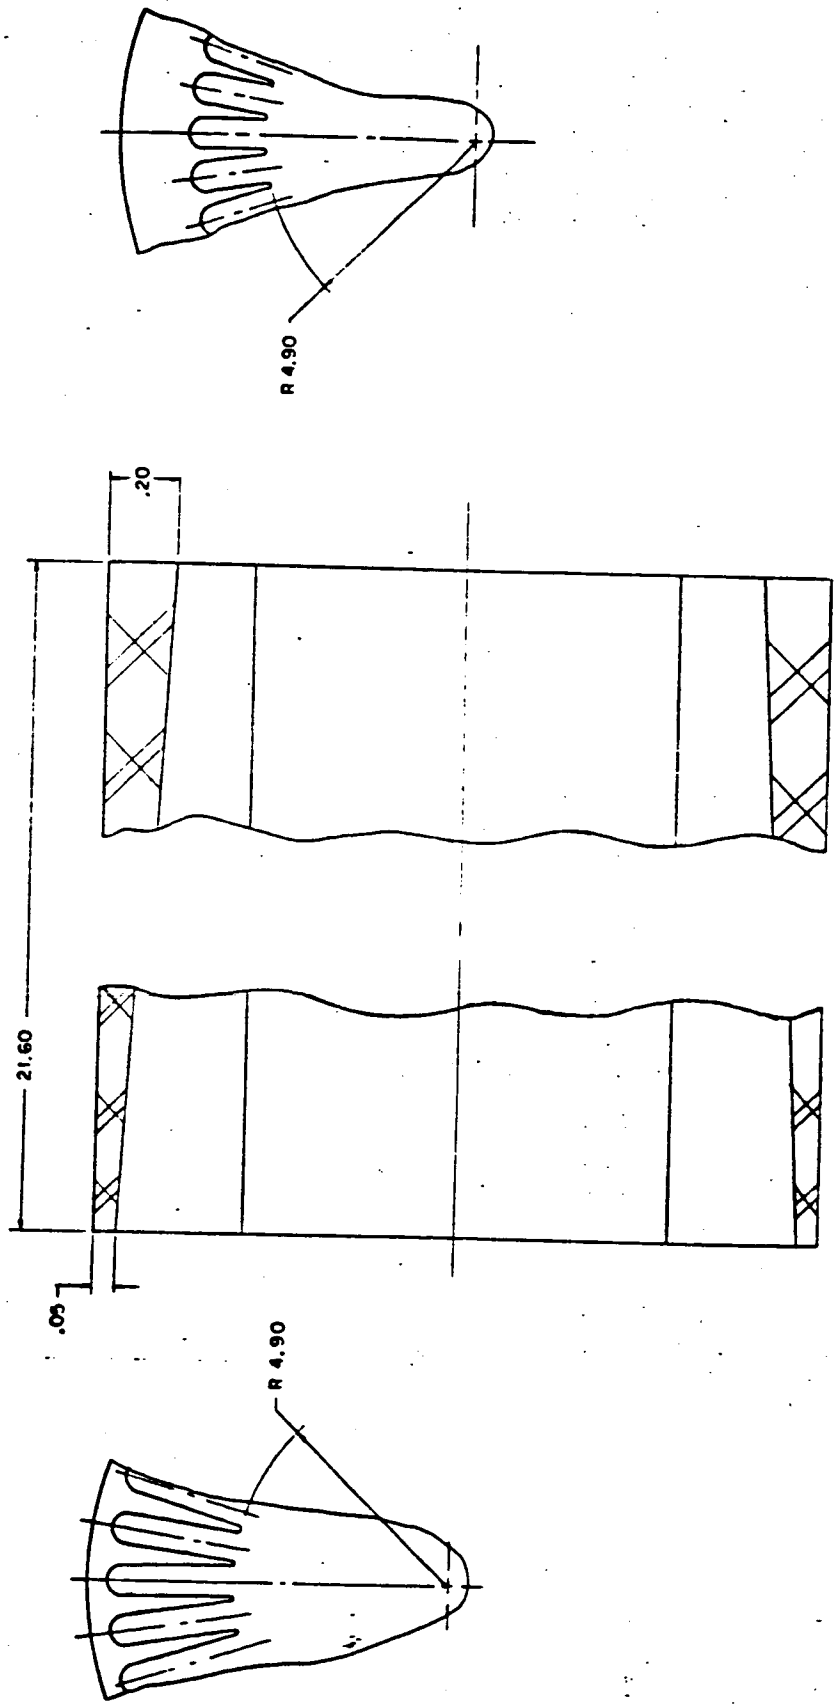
IMPROVED SRM IGNITER GRAIN.
